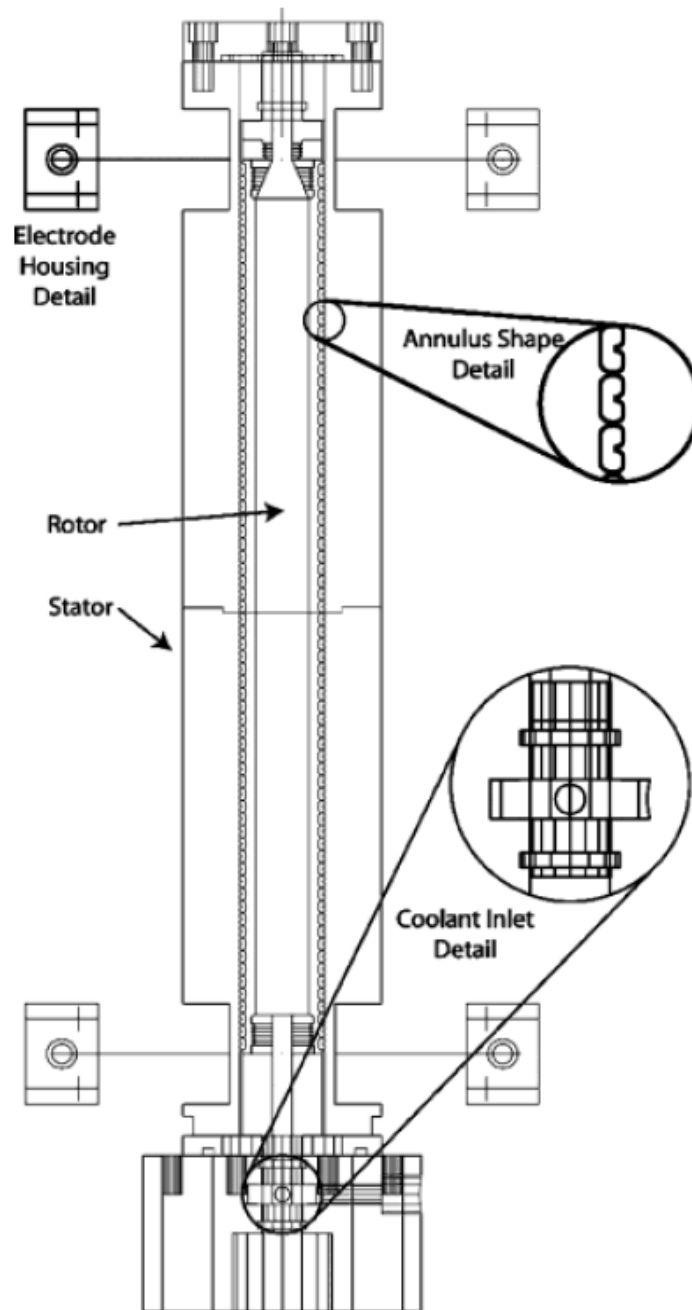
Schematic of the annular chamber rotor and stator. The coolant inlet assembly and one electrode housing are shown in detail. The annulus shape resembles a string of kidney beans connected by a short, narrow channel. The grooves were designed to have a tip-to-tip spacing roughly twice the rotor-to-stator spacing so that the vortex cells take the geometric form set by the shape of the rotor and the stator. Figure reproduced from [17].
